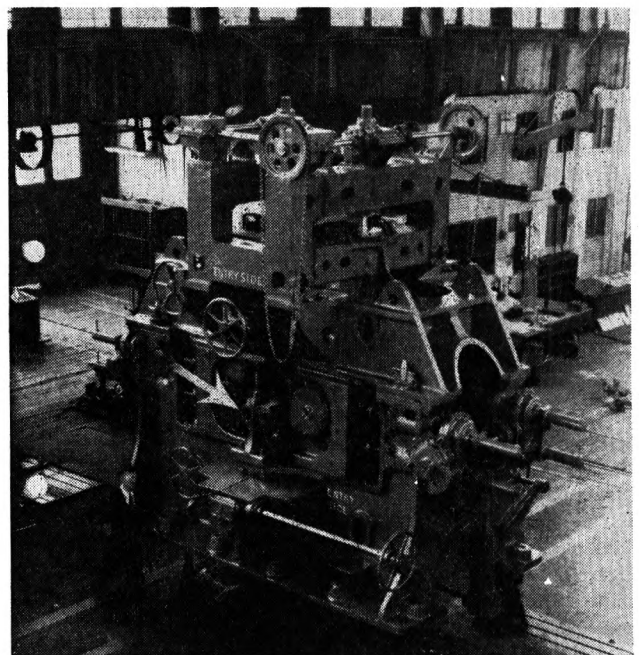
ASSEMBLY OF ELONGATOR STAND
